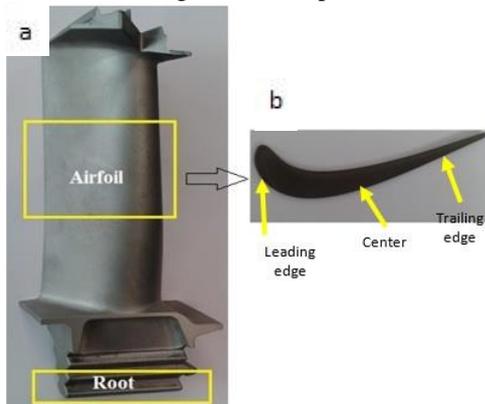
(a) Turbine blade and, (b) blade sectioning area.
